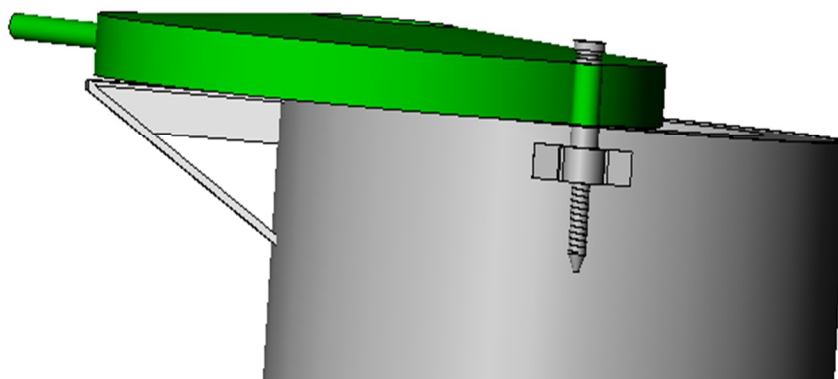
Fig IX: Furnace Cover's Opening/Closing Mechanism (All dimensions are in mm)
